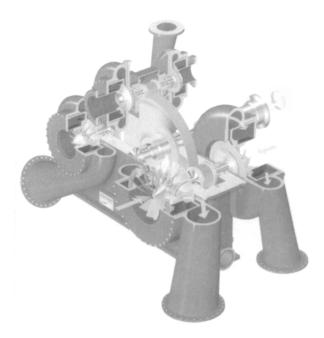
Integrally geared multistage compressor. (Source: Demag Delaval.)
